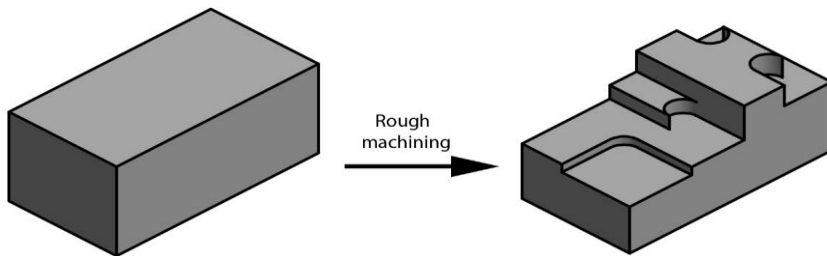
Work piece before and after rough machining with an end mill cutter
